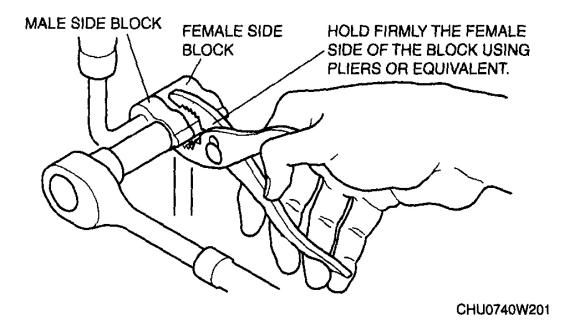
Connecting Block Joint Type Pipes Courtesy of MAZDA MOTORS CORP.
